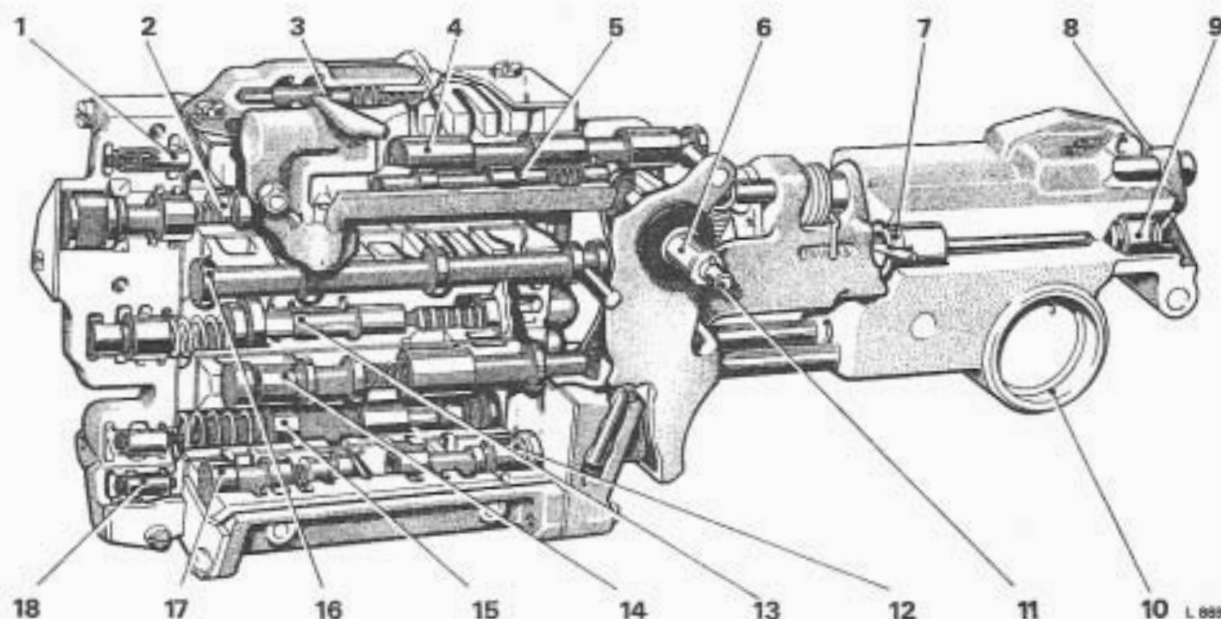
CONTROL VALVE UNIT ASSEMBLY
